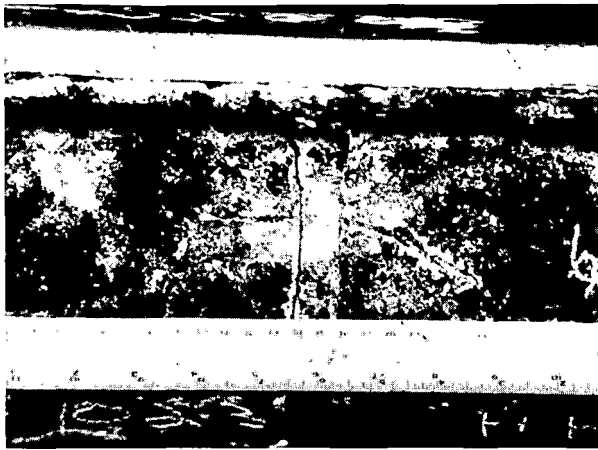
TYPICAL RAIL PLANT WELD FAILURE.
